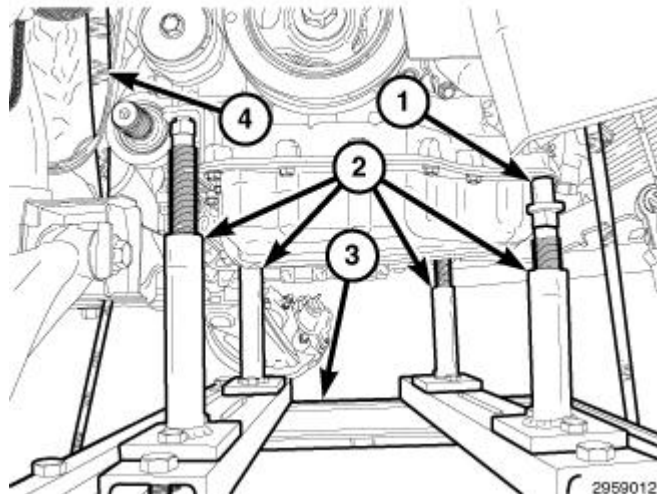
Adapter, Engine Support Cradle, Power Train Dolly & Safety Straps
